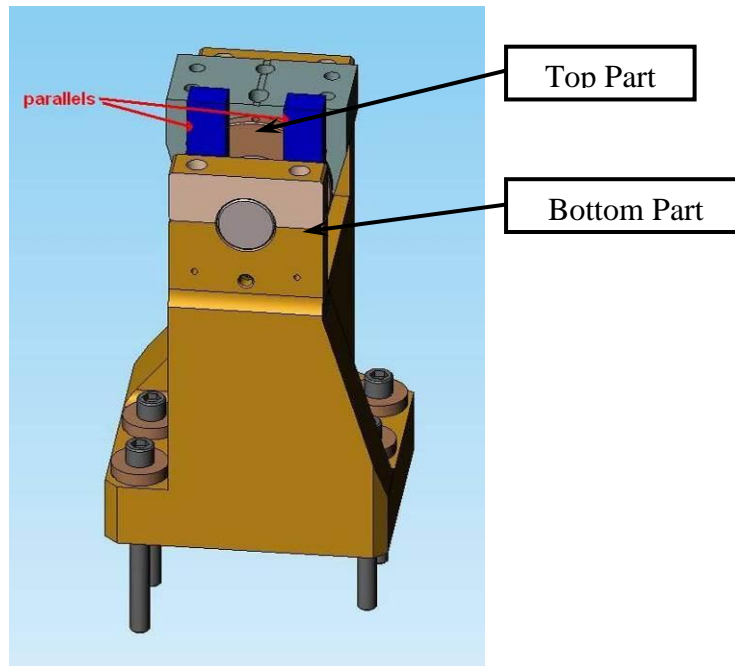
Using Shims to make sure the Bottom Part of the Locker is parallel to the Top Part
